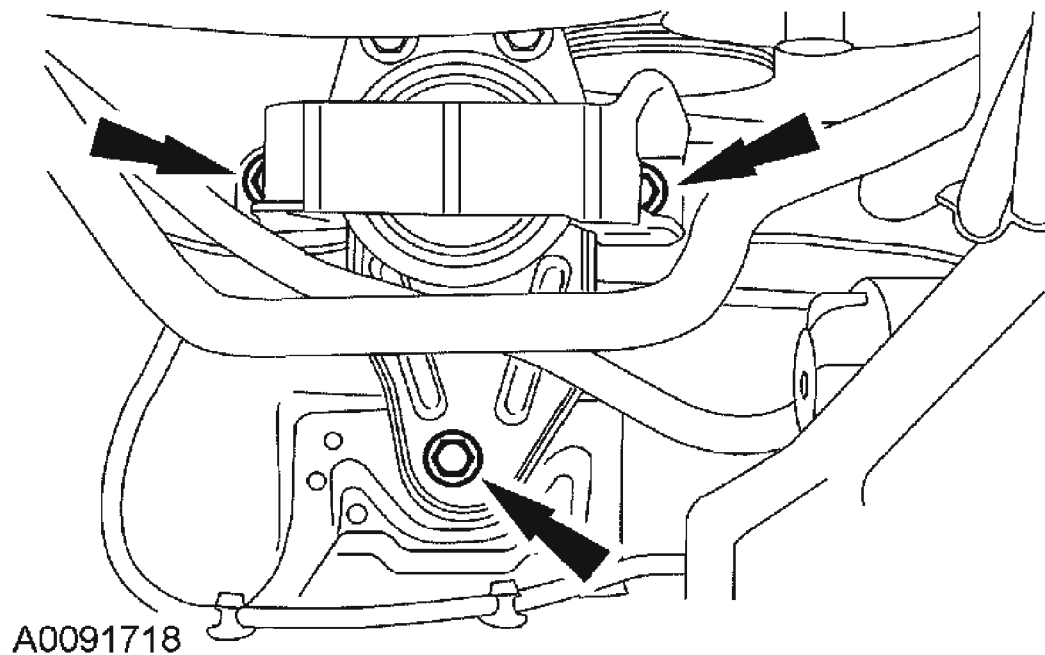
Removing Engine Mount Bolts And Engine Mount
